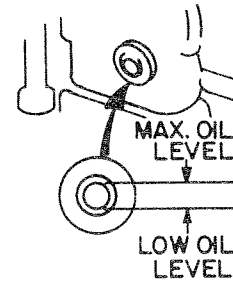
Oil Fill Gage for AS-XXX and AD-XXX
